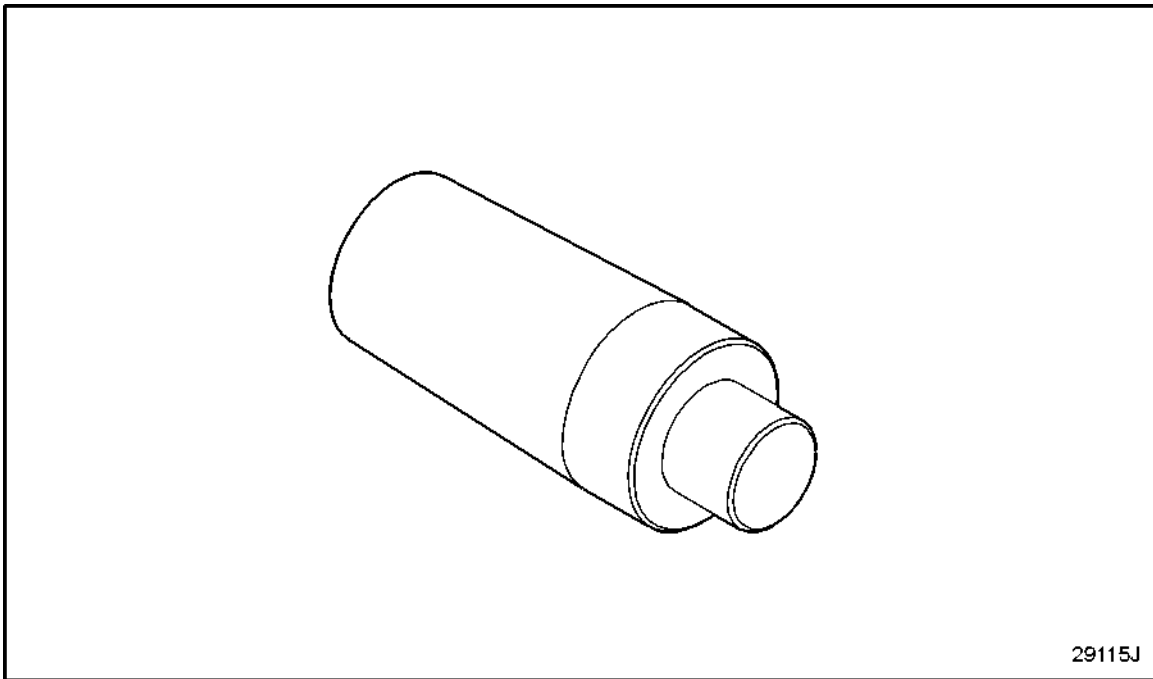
Piston Pin Alignment Tool, J 35619
